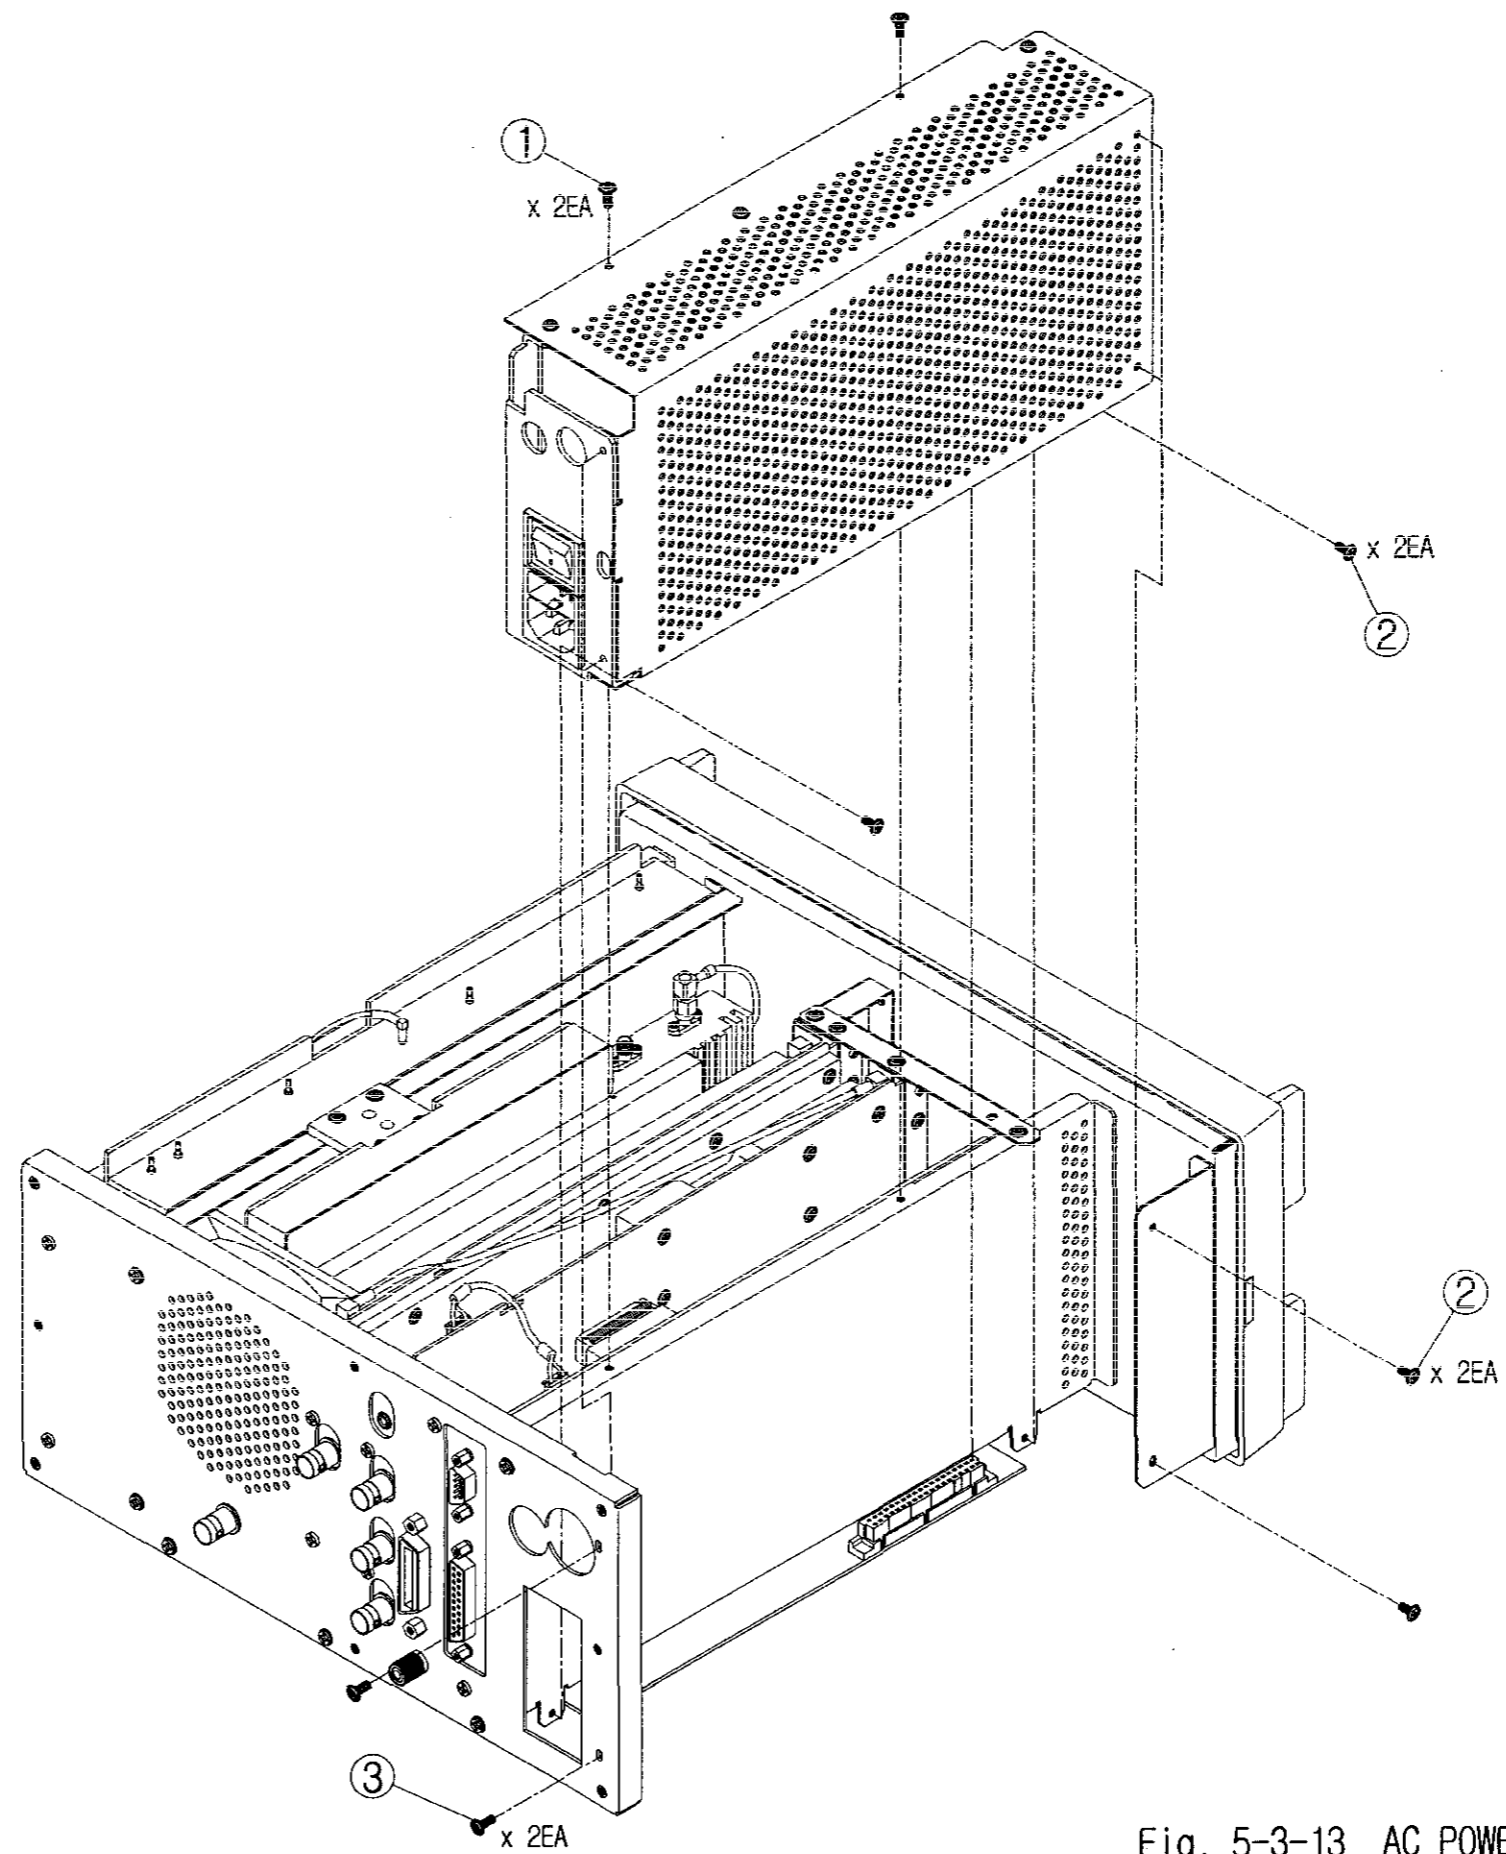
AC POWER SUPPLY MODULE ASSEMBLY
